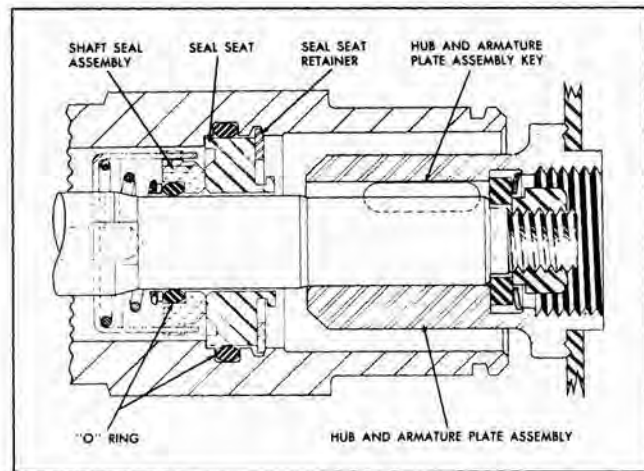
Cross Section of Compressor Shaft Seal Area
